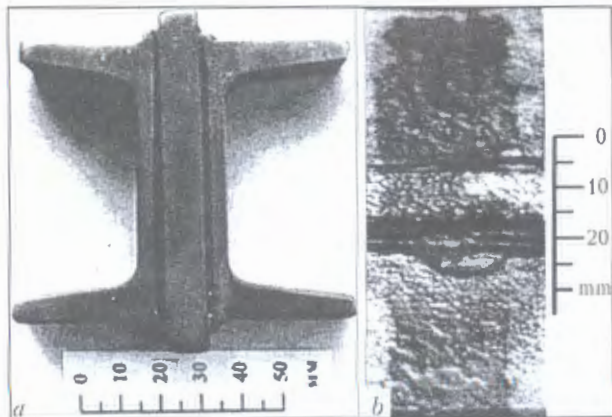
Cracks in weld metal made by electrodes UONI-13/55 in spots of anvils welding to vibrating beam observed in the process of repair: a – cross-section of beam; b – the same, top view
